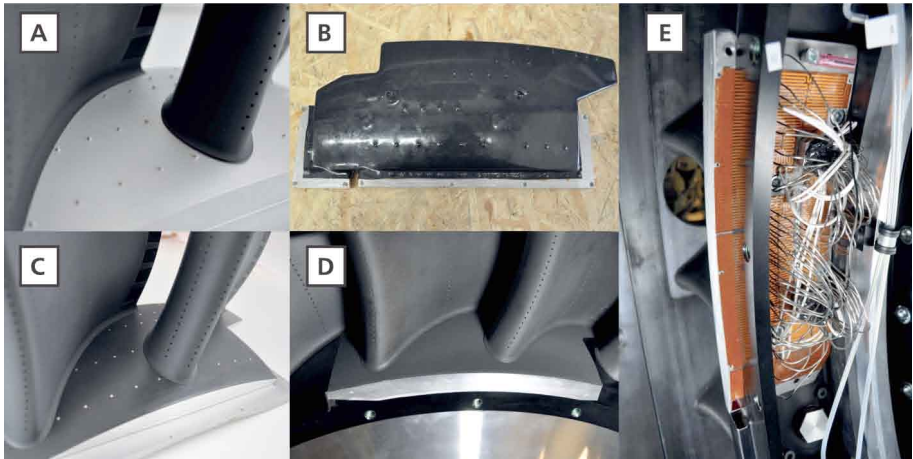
Manufacturing steps of the auxiliary wall and instrumentation carrier
